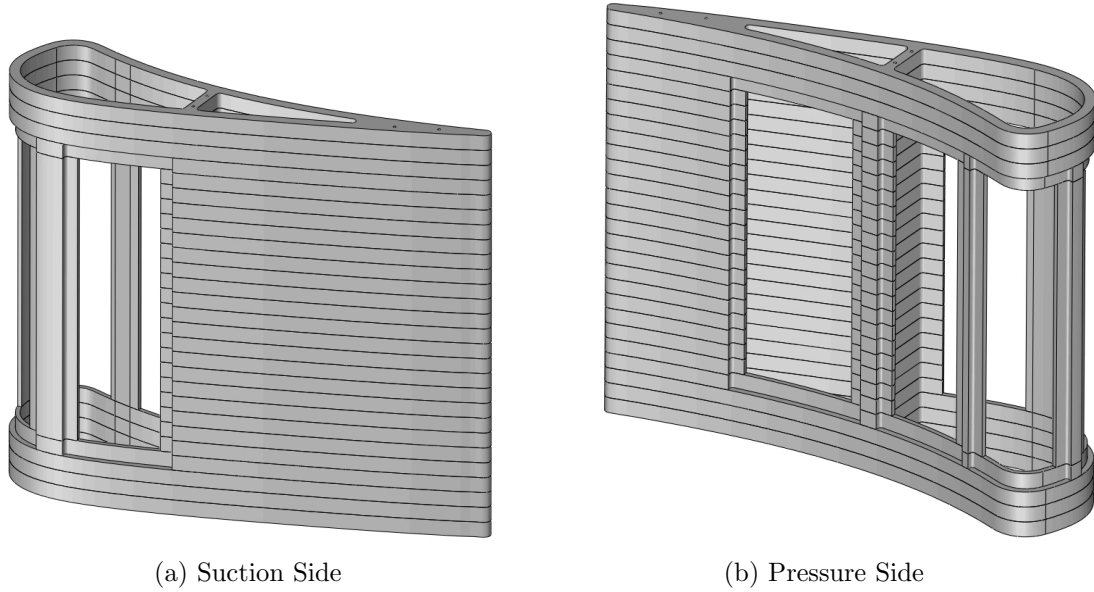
CAD illustration of vane body composed of laminated layers with openings for removable “hatches”
